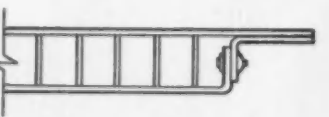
Lower face of panel flanged and blind riveted to flange of an angle
